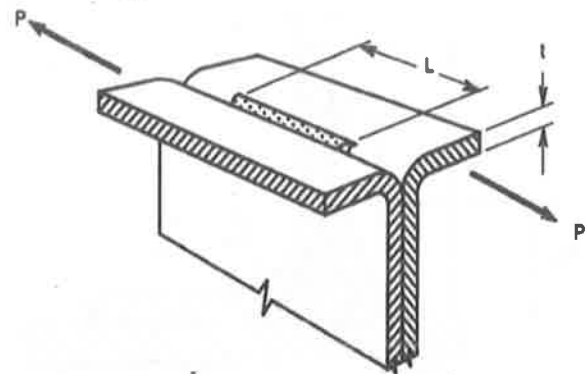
Shear in Flare V-Groove Weld
